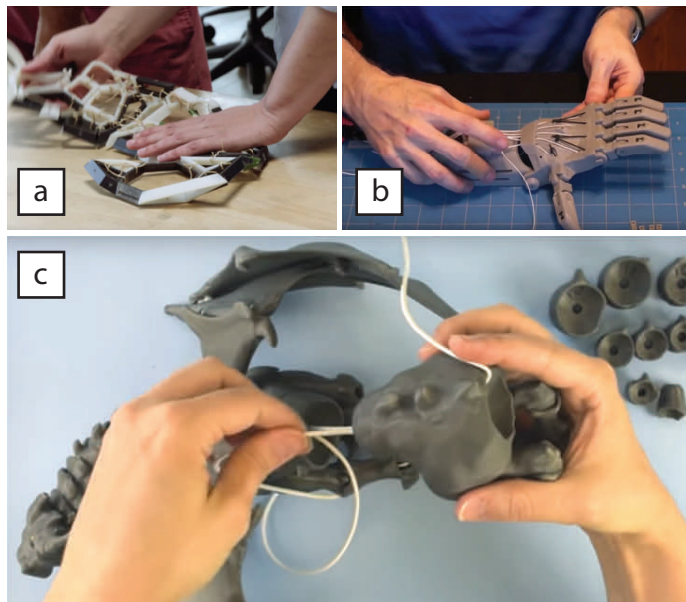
(a) Fold-flat bicycle helmet made from 3D printed parts connected by cables [2]. (b) Threading tendons and elastics into the e-Nable 3D printed raptor hand [3]. (c) Feeding elastic cables through an articulated 3D printed model [4].
